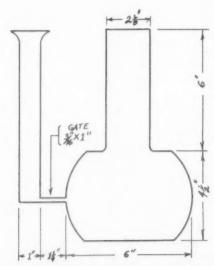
HEAVY SECTION CASTING FOR SHRINKAGE TESTS.
